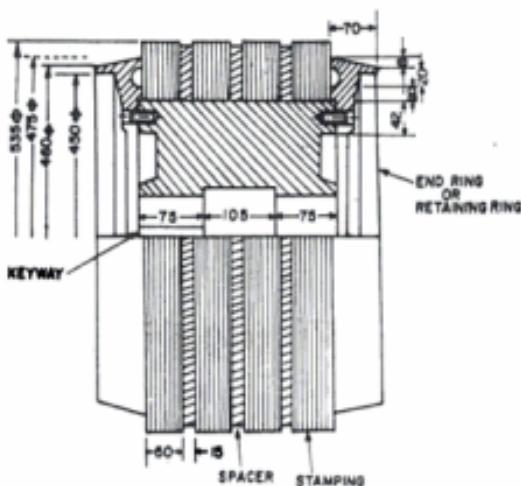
Half sectional elevation of the armature of a large d.c. machine
